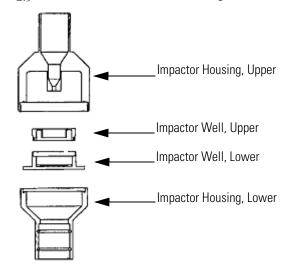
Exploded View of PM_{2.5} WINS Impactor
